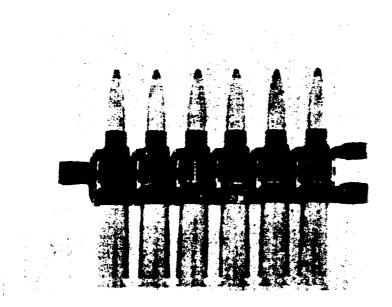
Metallic Linked Belt Package Defect No. 7-Defective Protective Finish.
